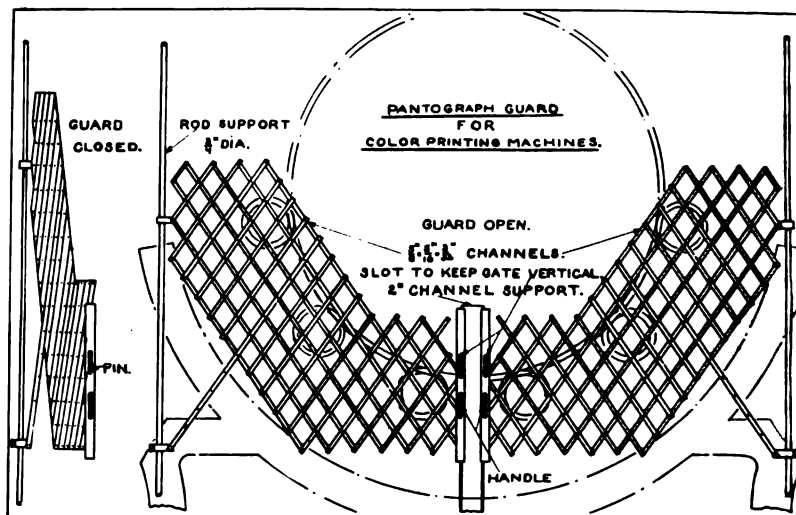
Pantograph Guard for Color Printing Machine. (Standard Wall Paper Co.)
